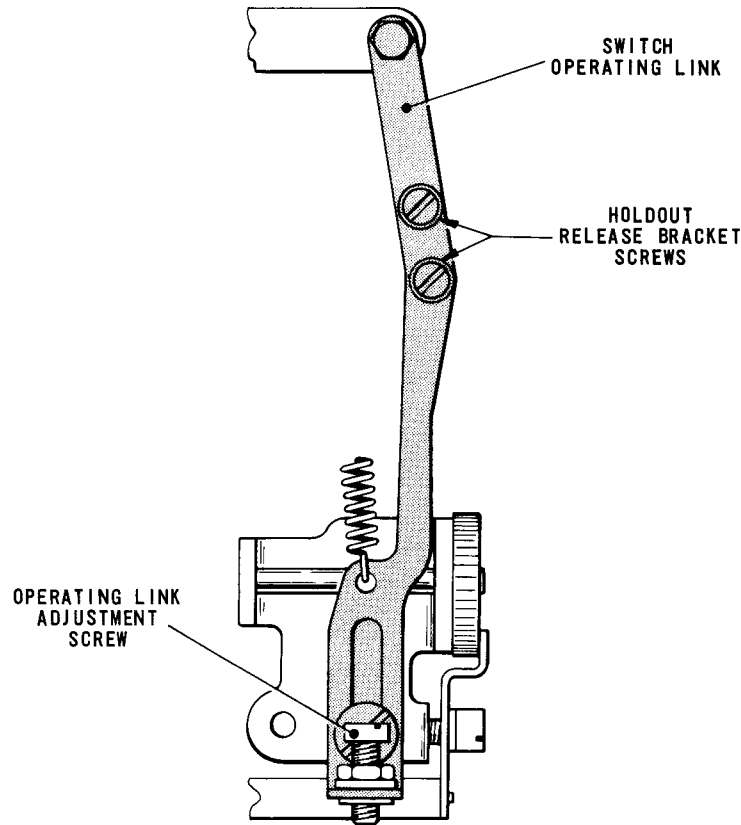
STARTER SWITCH TIMING MECHANISM
